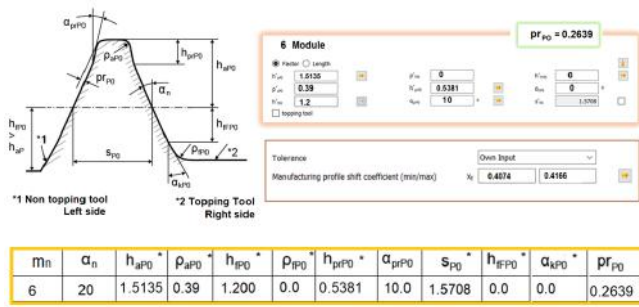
Protuberance hob parameters (sample for 6 module gears)
